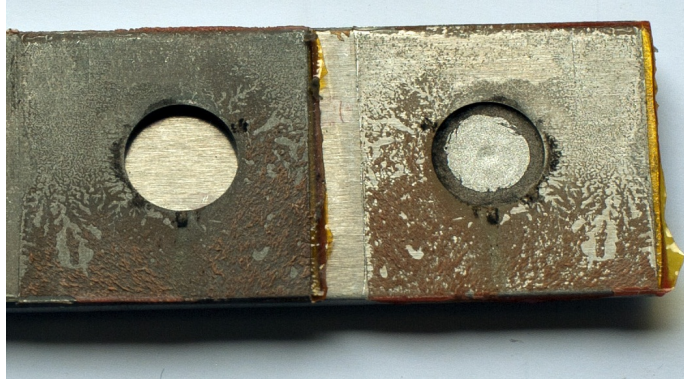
Fractured Adhesive-Only Specimen, with FBJ Removed Prior to Testing
